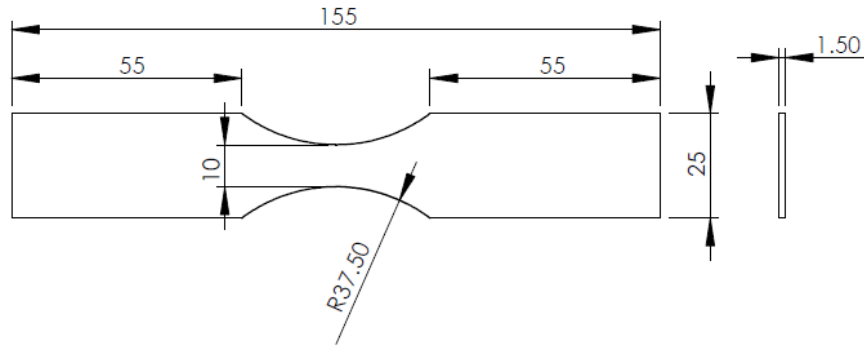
Geometry of dog-bone fatigue test specimen. All dimensions are in 'mm'.
